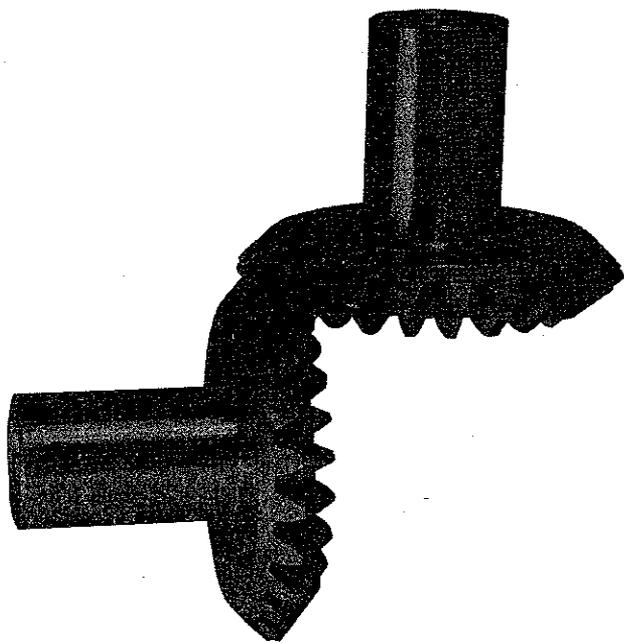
Bevel Gear - Showing Extreme Pitch Alignment
